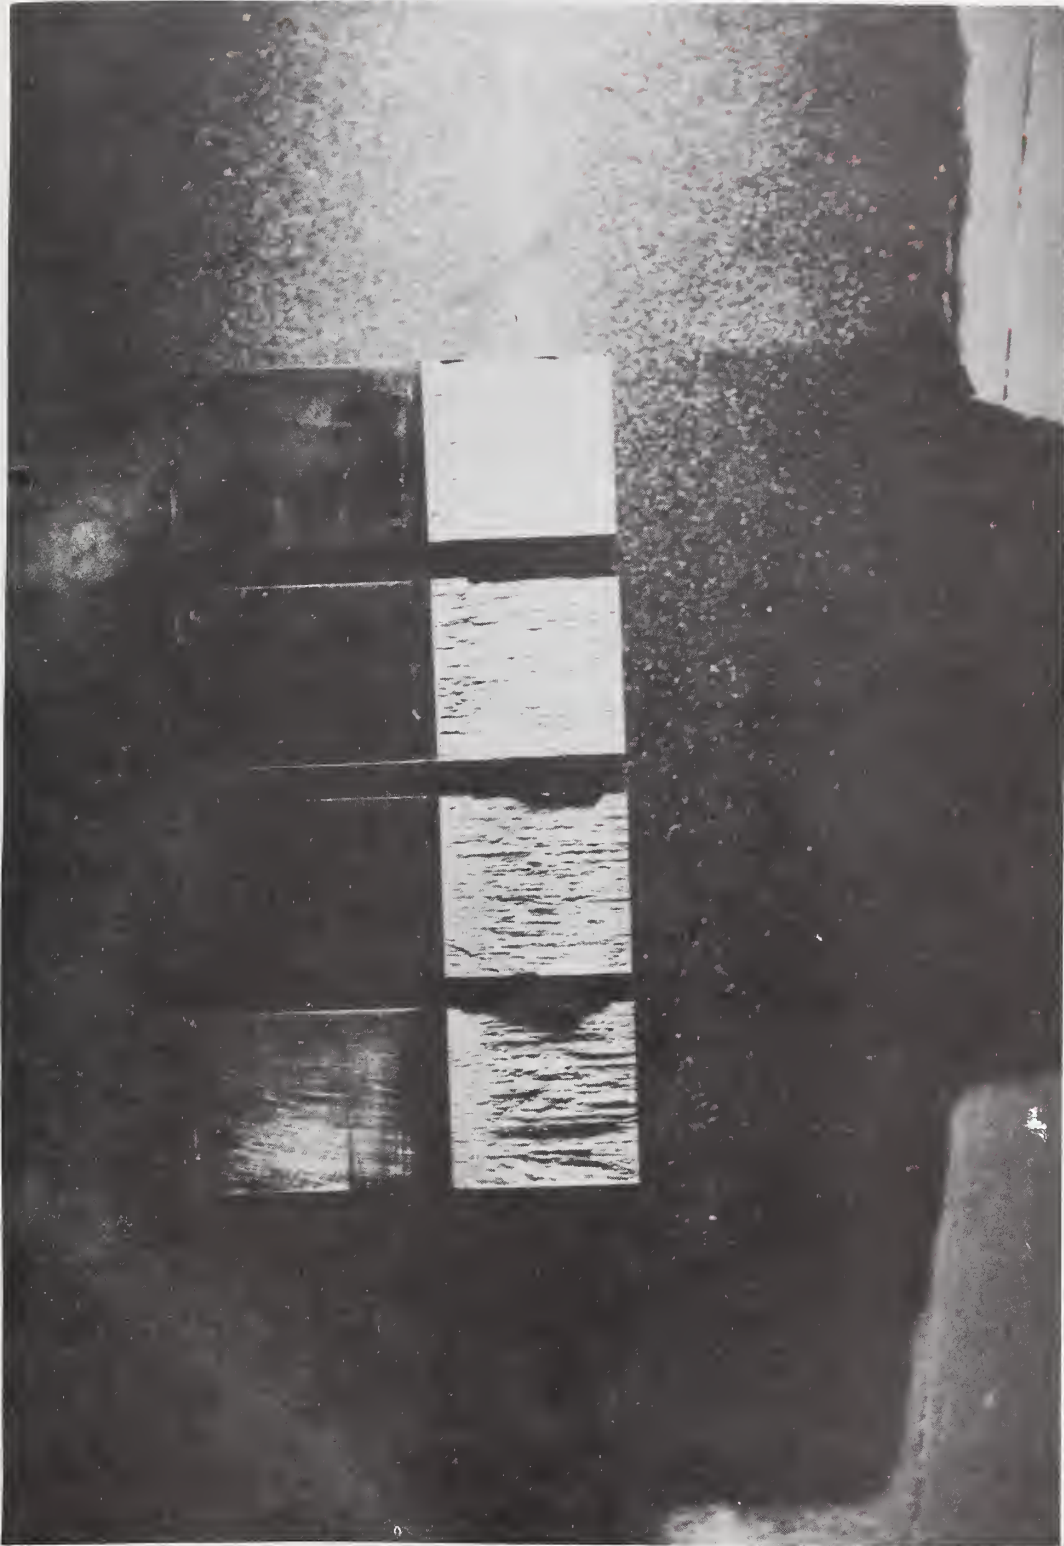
Fracture Surface Appearance of Ti-6Al-4V Specimens
